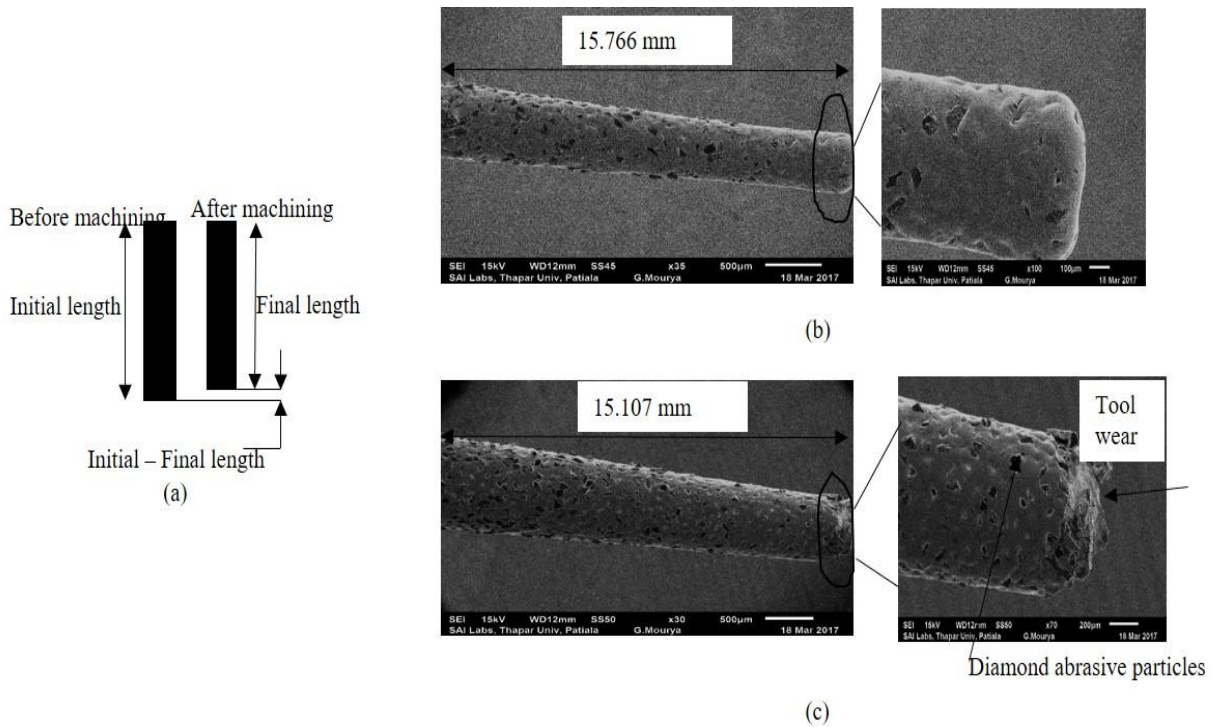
(a) Illustrative view of longitudinal wear; (b) Fresh tool; (c) Tool after machining the channel
